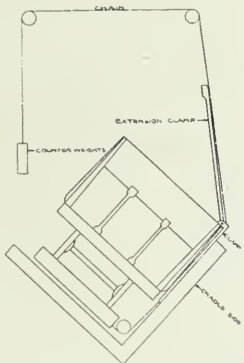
Showing Position of Clamps as Cradle is Turned.
